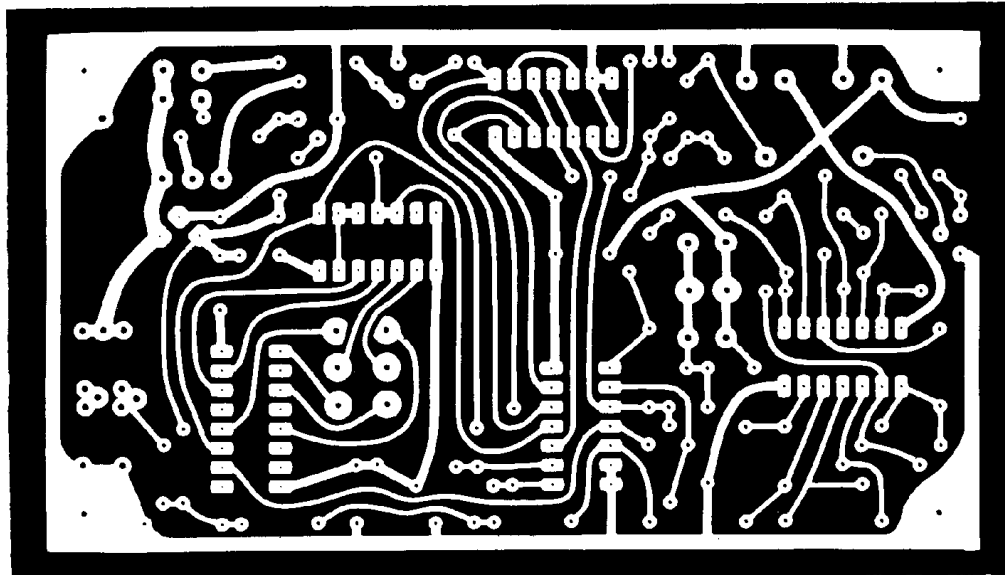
Full-size etching and drilling guide for the receiver pc board.
